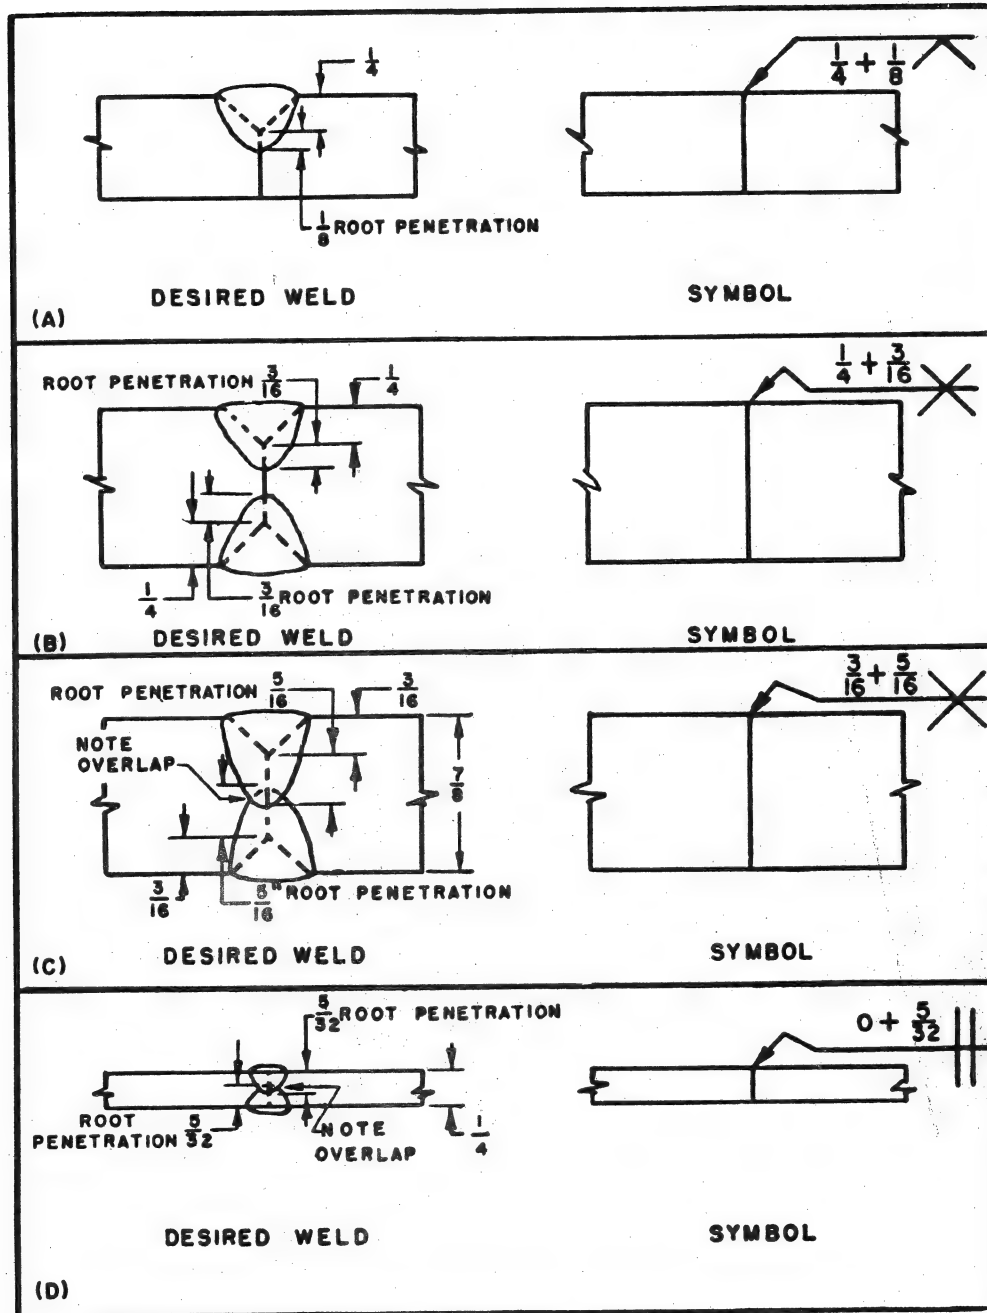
Designation of Size of Groove Welds with Specified Root Penetration
